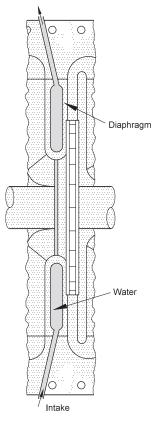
Cutaway of a liquid-cooled diaphragm.
